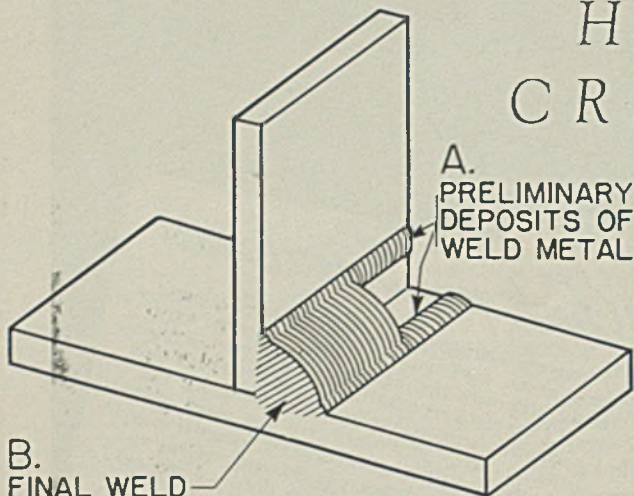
(Above) — To avoid interior cracking, "double welding" first deposits weld metal on both plates as shown at A. Main weld B is then made between the original deposits. This avoids an abrupt change in section
